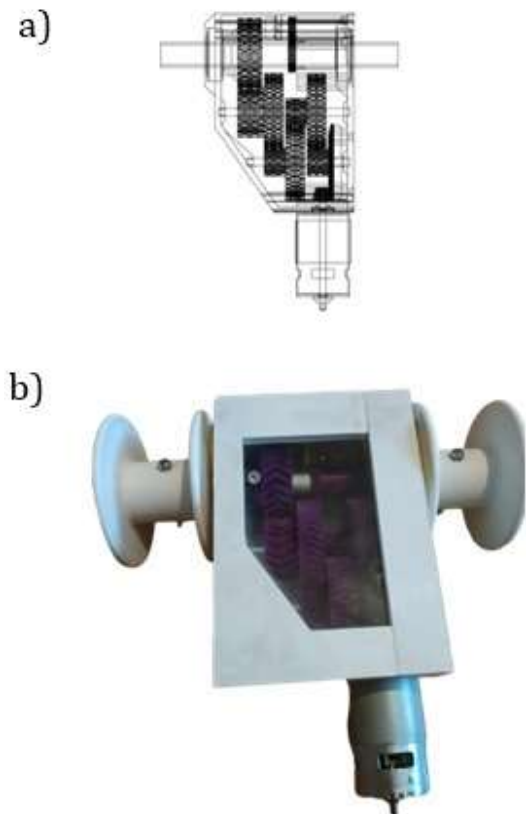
Gear mechanism integrated with the motor: (a) design schematic with housing [20]; (b) 3D-printed and assembled version used in the prototype
